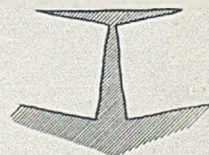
Sectional Diagram showing the Type of Defect produced on the Test Casting by the Mould Buckle.
